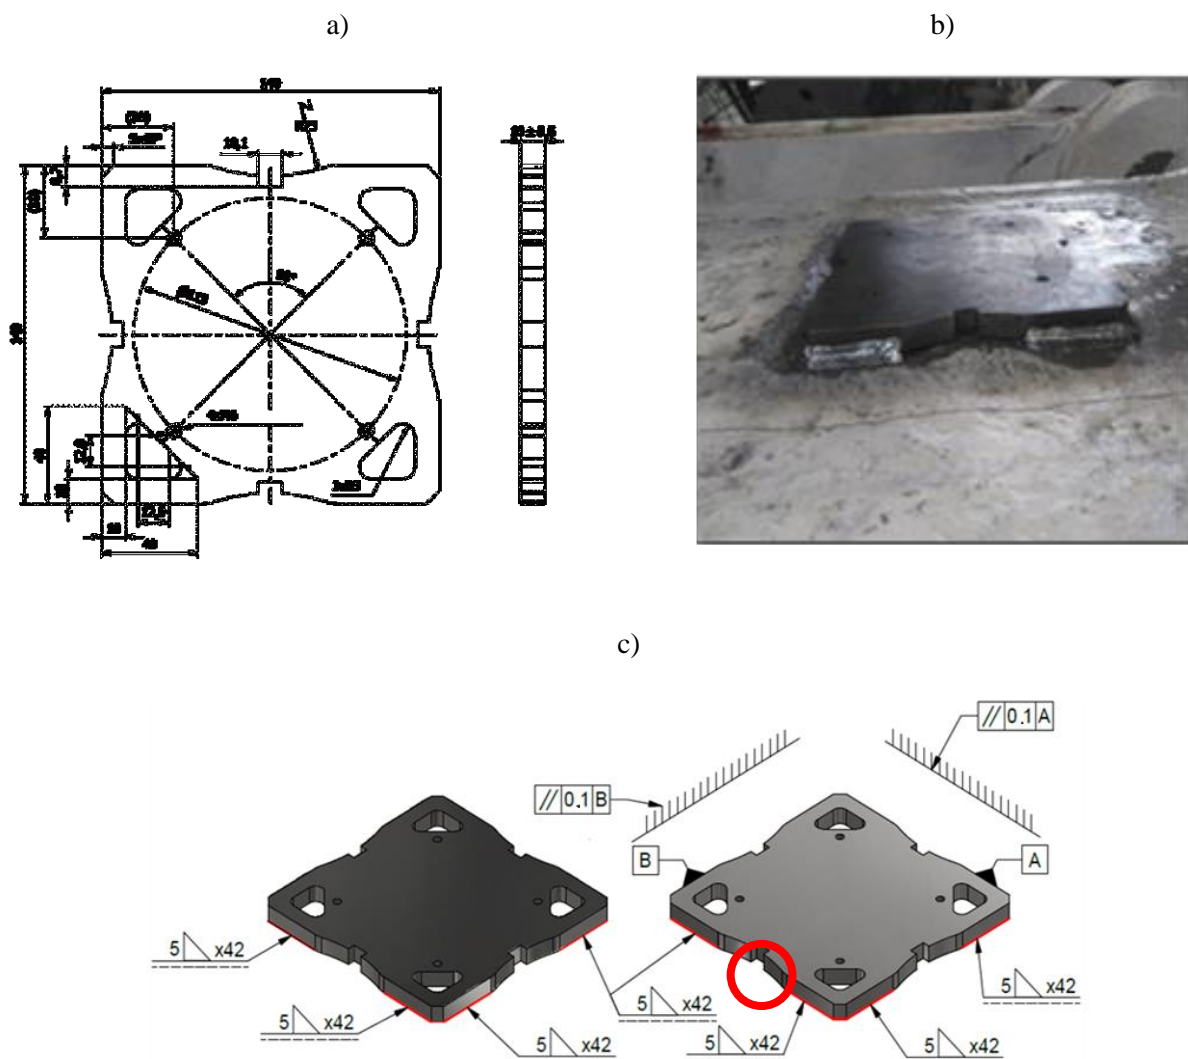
Innovative mounting bracket, where: a – geometric parameters of the sheet, b – view of the mounting sheet on the test stand - lemniscate, c – parameters of sheet mounting
